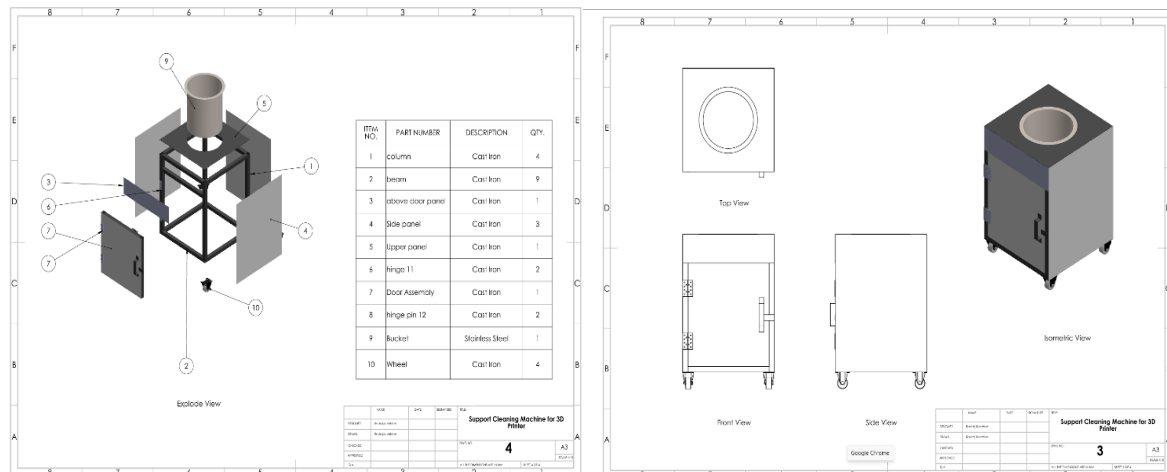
Dimensions of Support Cleaning Machine For 3D Printer
